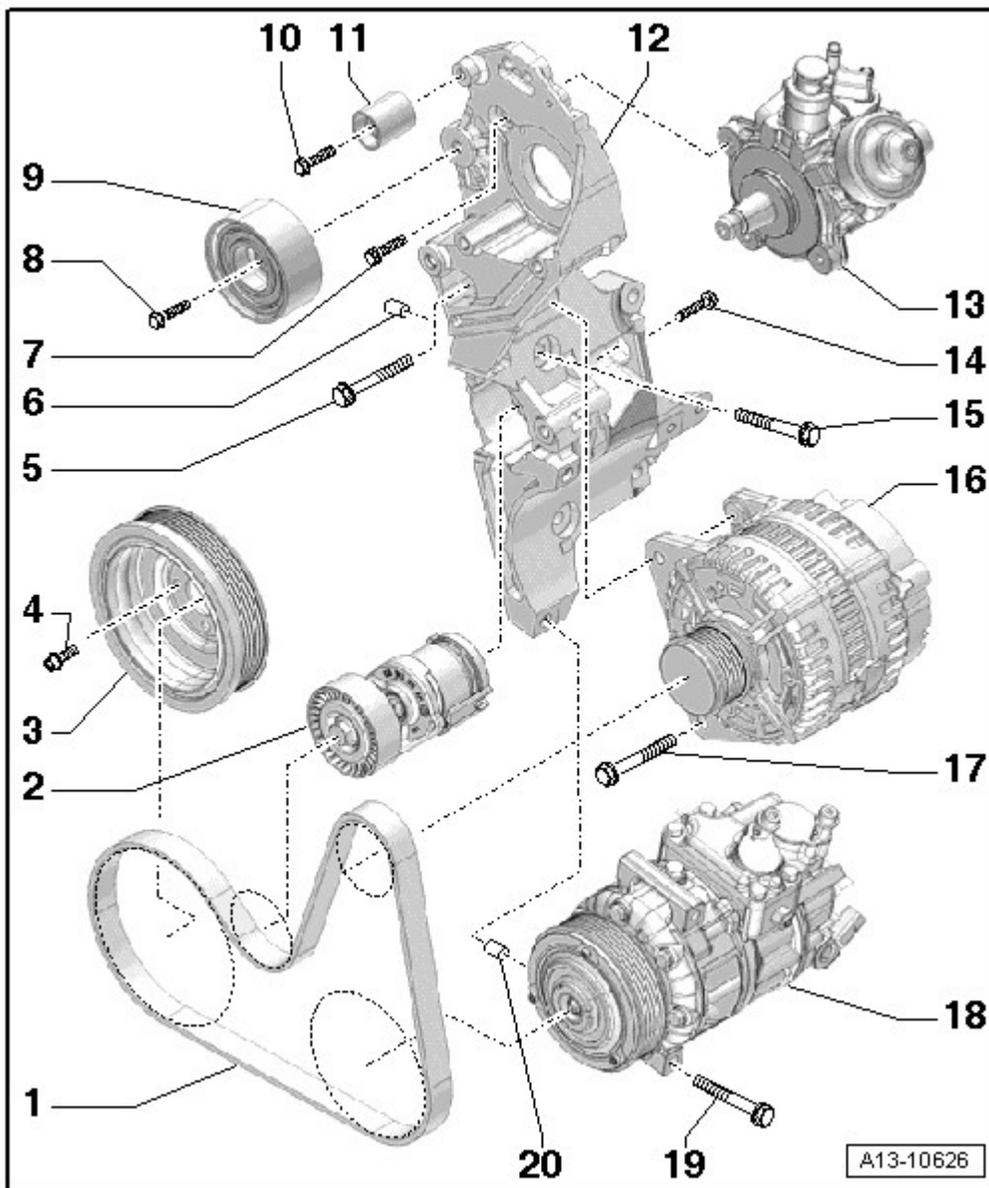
Ribbed Belt Drive With Tensioner And A/C Compressor Assembly Overview
